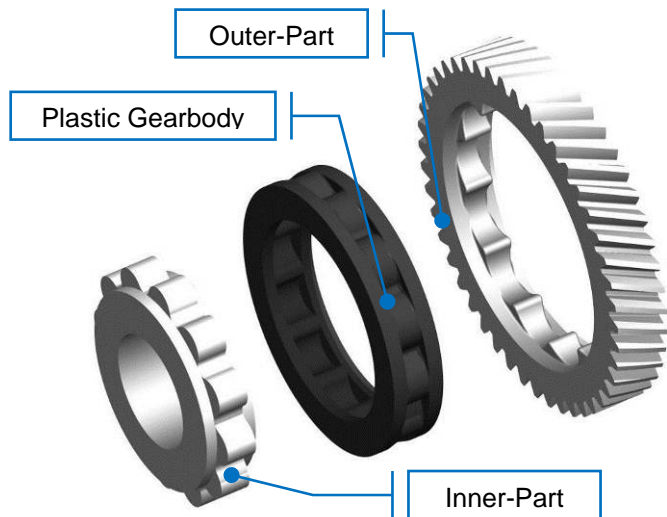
Basic concept of the discussed Compound-Gear with two steel parts and a plastic gear body.
